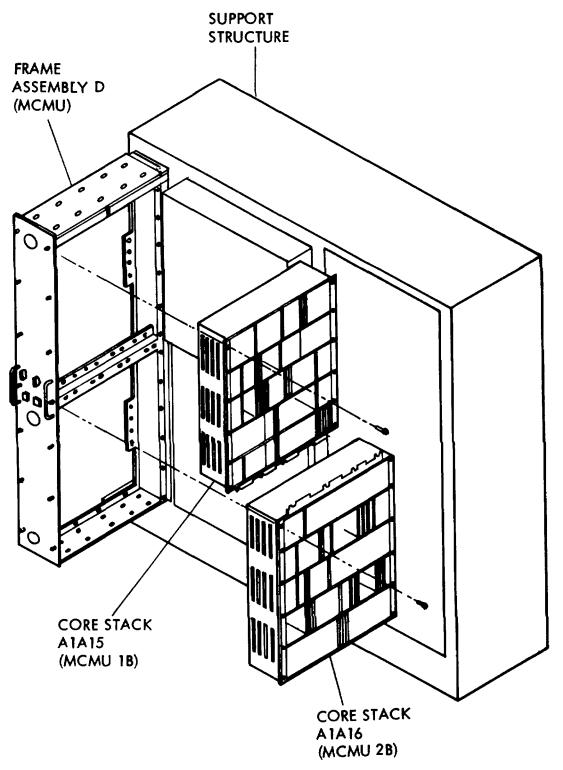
Circuit Switch ADP Assembly Sheet 5 of 5).
